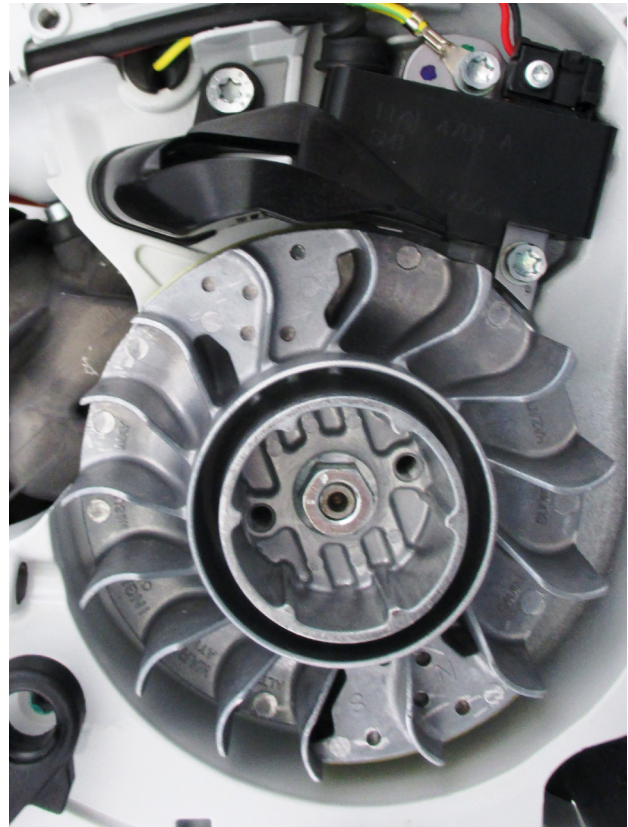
All components of the ignition system should be kept clean and free from any damage. This includes the coil, the flywheel (shown here), and the spark plug.
